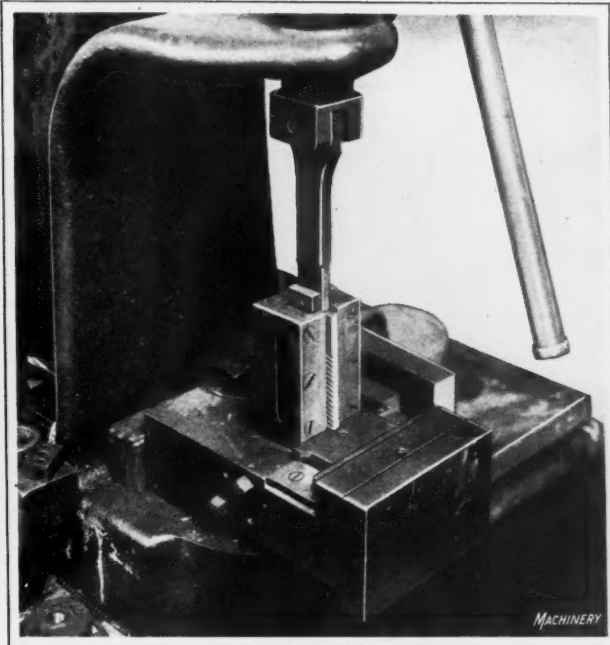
Broaching the Locating Key Slot to Size in the Reamer Body after the Blades have been assembled
